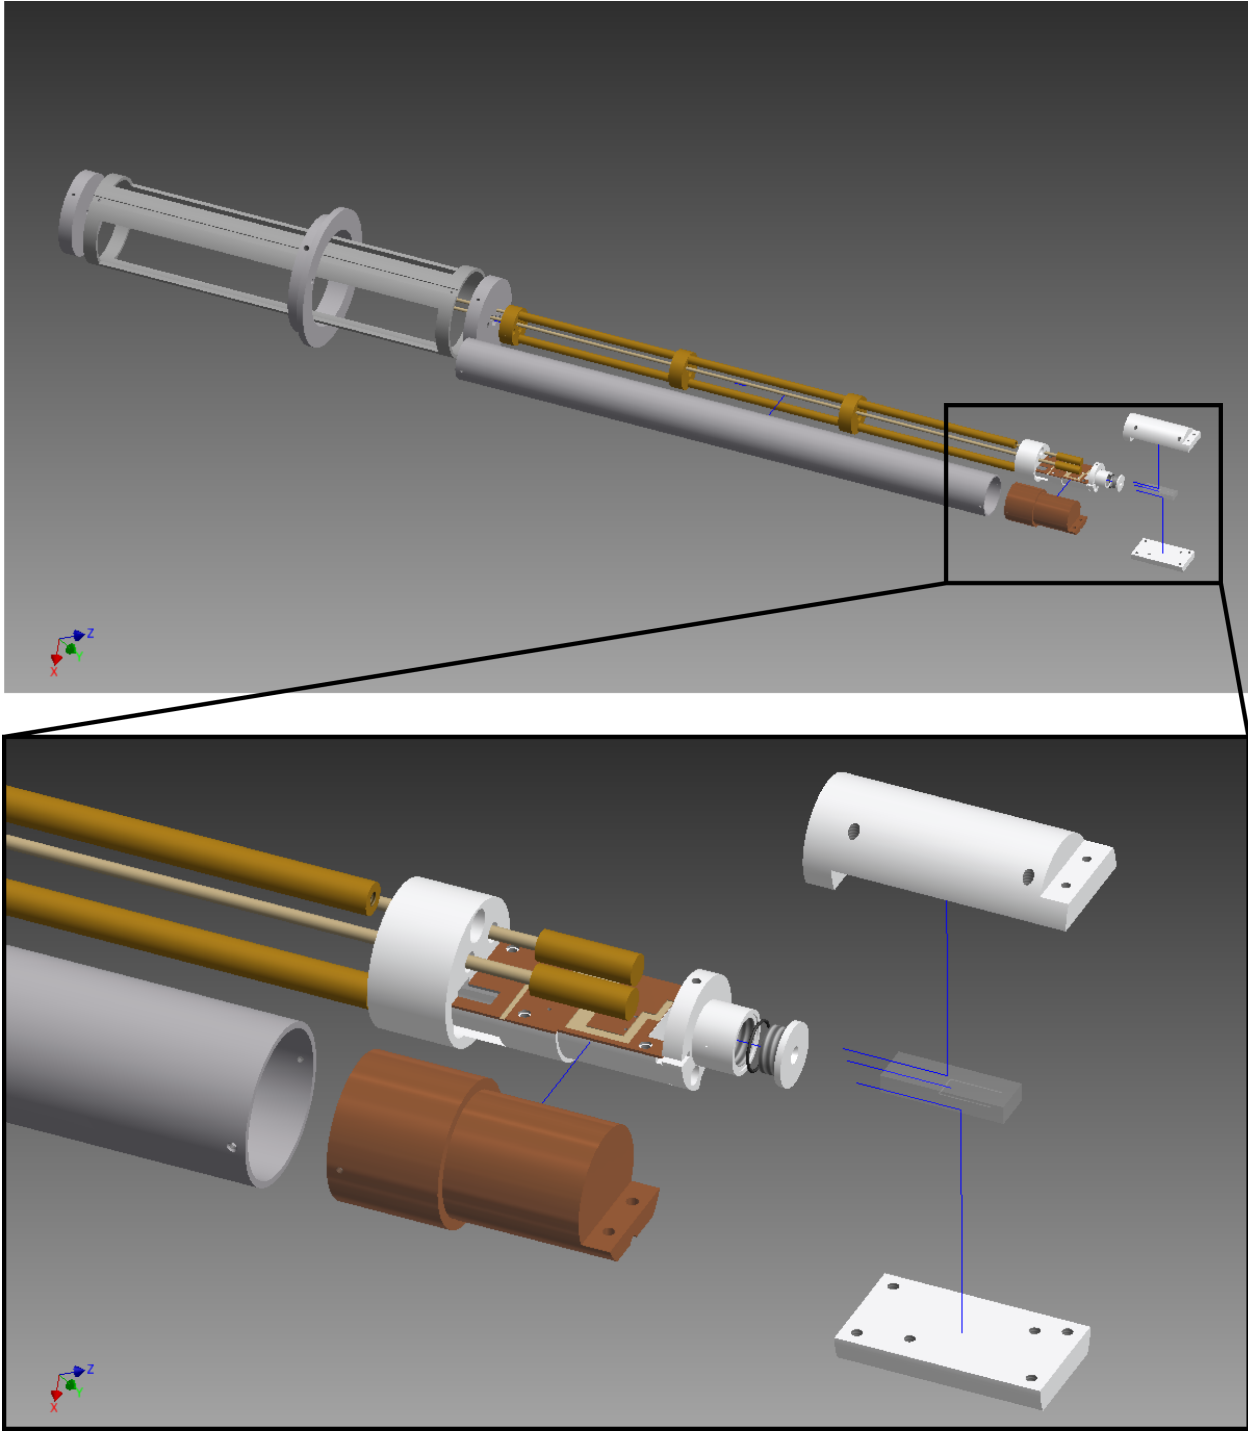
Exploded view of the auxiliary microcoil detection probe.
